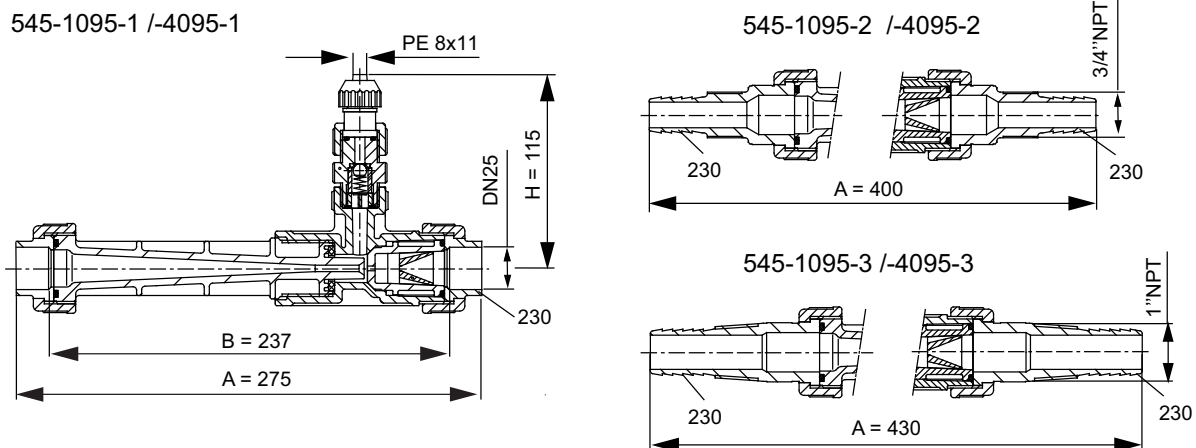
Dimensional drawings, 545-1095-1 to 545-4095-3 injectors
